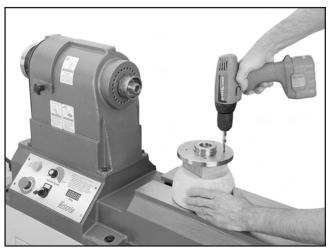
Typical attachment of faceplate to workpiece (shown with backing block).
